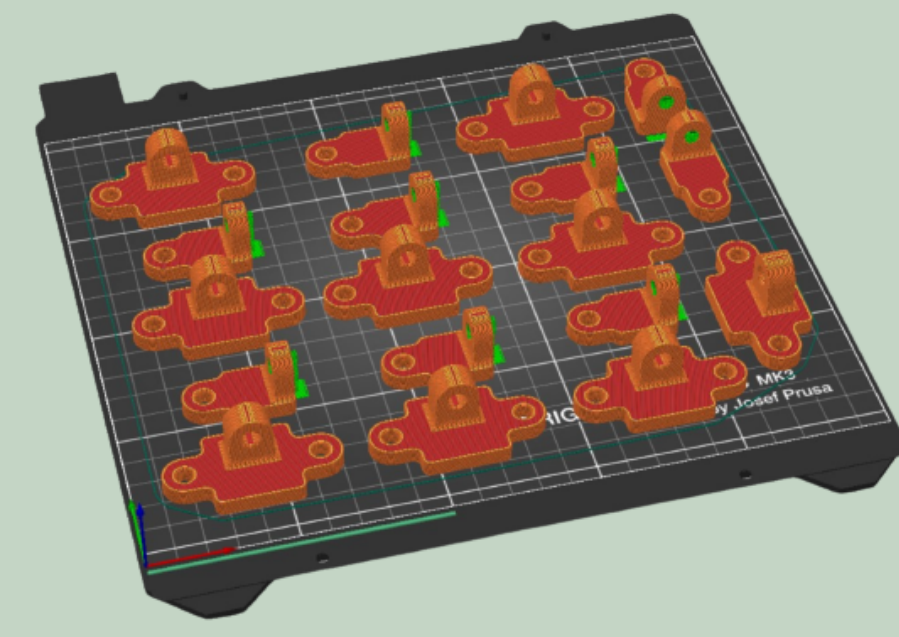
3D-Printing of LED holders. This technique has shown to be cheap and efficient, perfect for manufacturing most custom mechanical components within the module.
